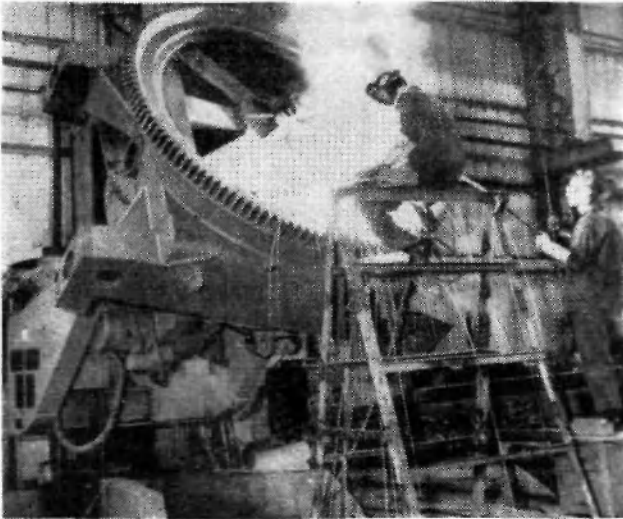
Welding of car body (Excavator) on Manipulator
